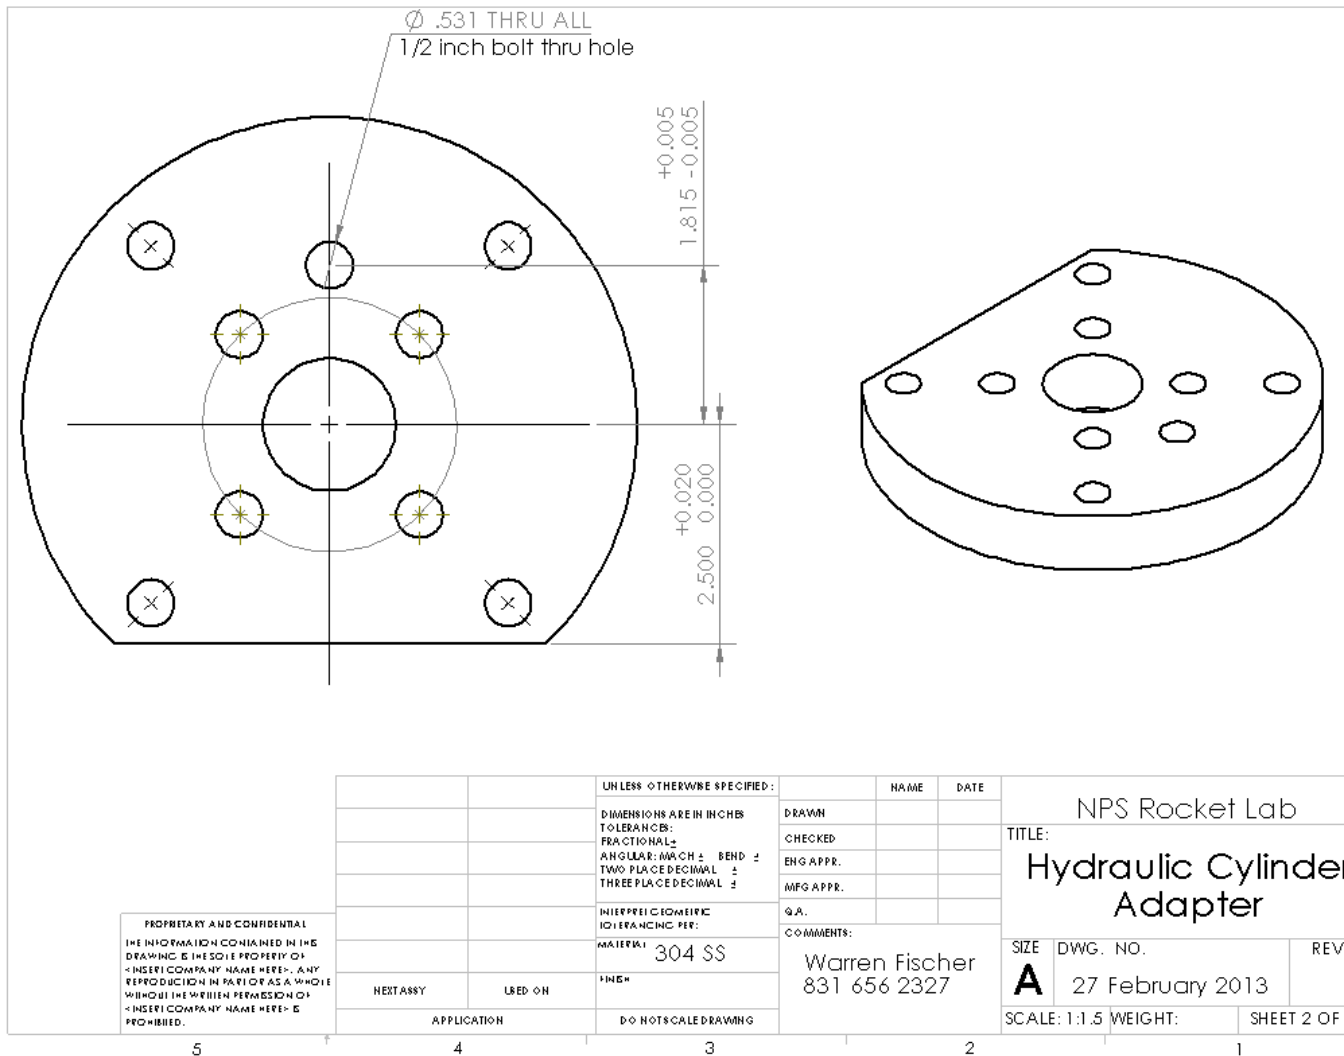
Fabrication Drawing for EMD Injector Adapter Hydraulic Cylinder Retaining Plate (View 2 of 2)
